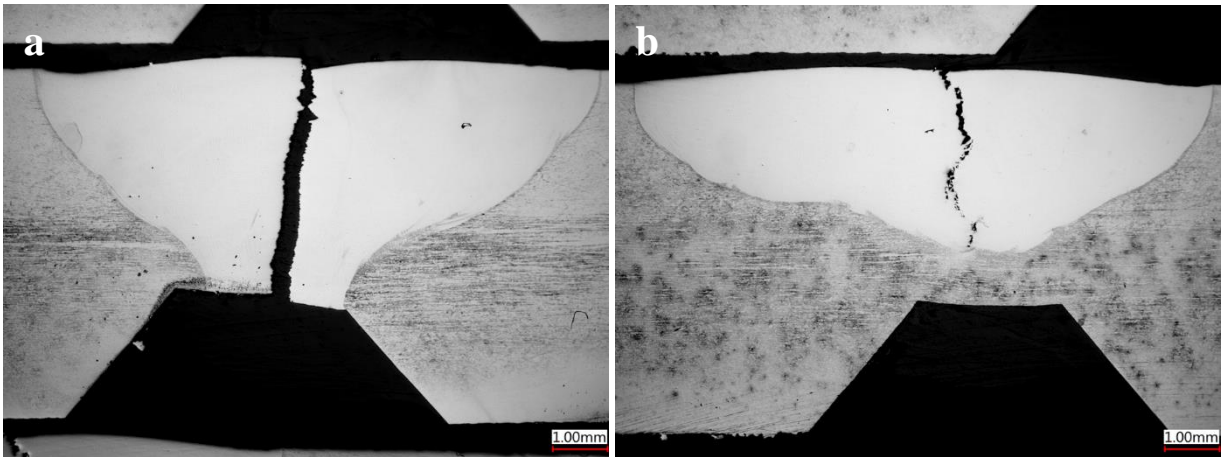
Cross-section view of the centerline solidification cracking after circular patch test test using the Alloy 709 weld wire with <20 wppm-P on a 304L plate.
